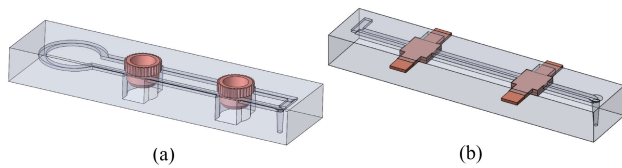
CAD visualization of the test parts for measuring the contact resistances, geometry for threaded inserts (a), geometry for contact plates (b).
